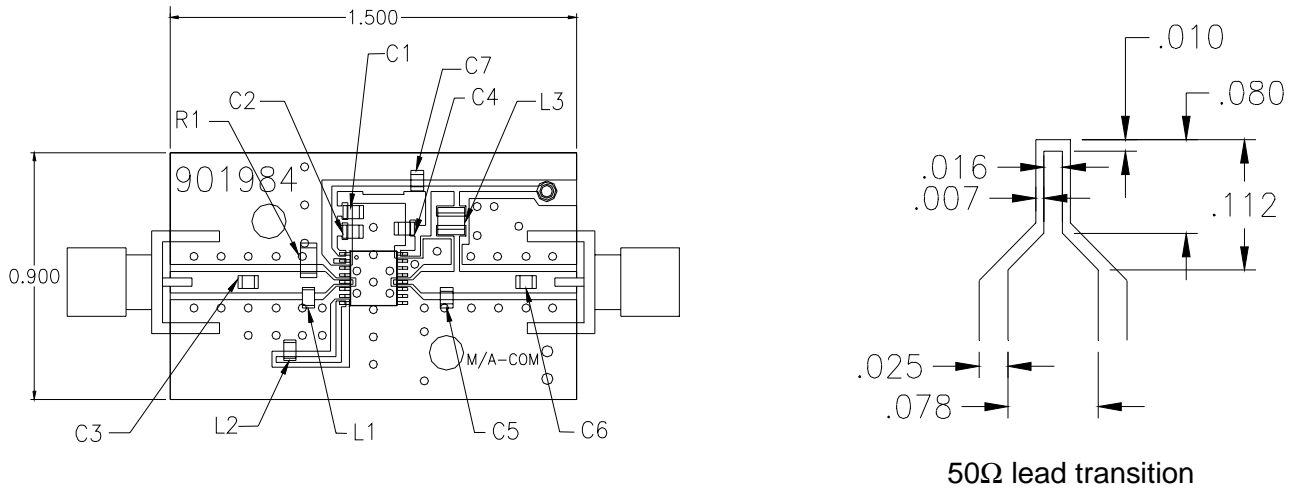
Component layout and printed circuit drawing for evaluation board (units in inches)
